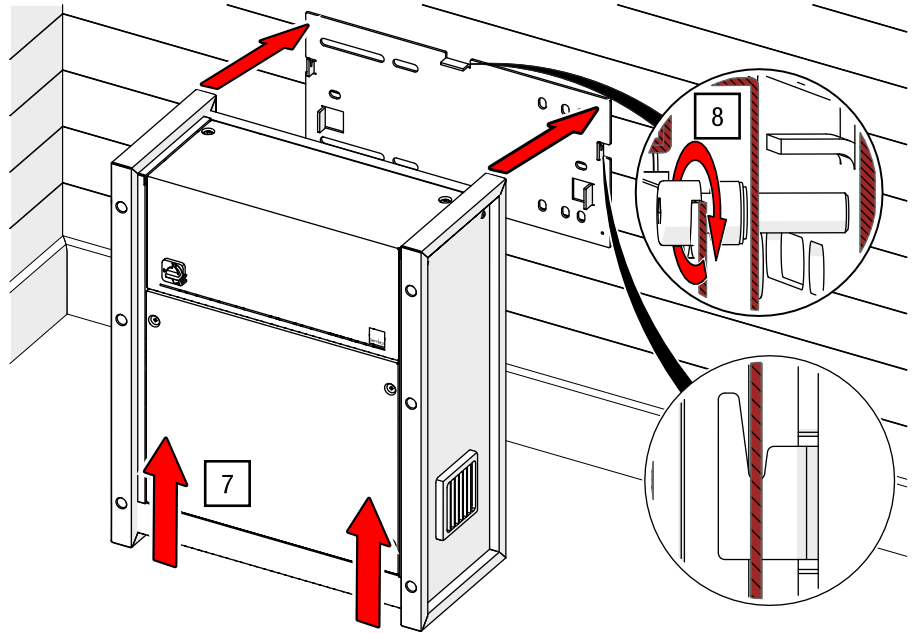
Fixing the control unit to the wall mounting plate (control unit model may vary)
